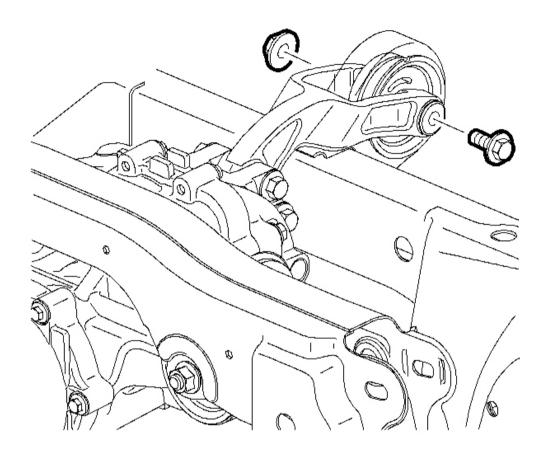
Rear Drive Module, Bracket, Bolts & Nuts Courtesy of GENERAL MOTORS CORP.
